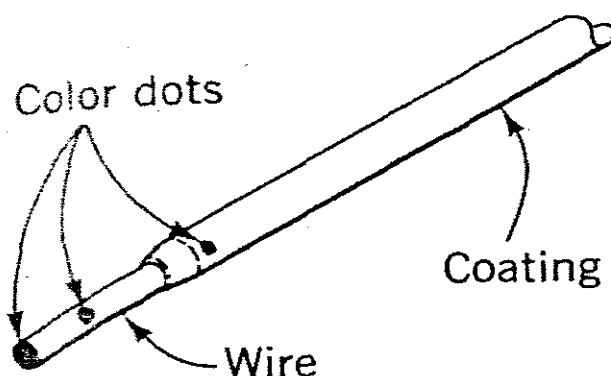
Depicting MMA. electrode constituents and markings (from Welding and Welding Technology)
